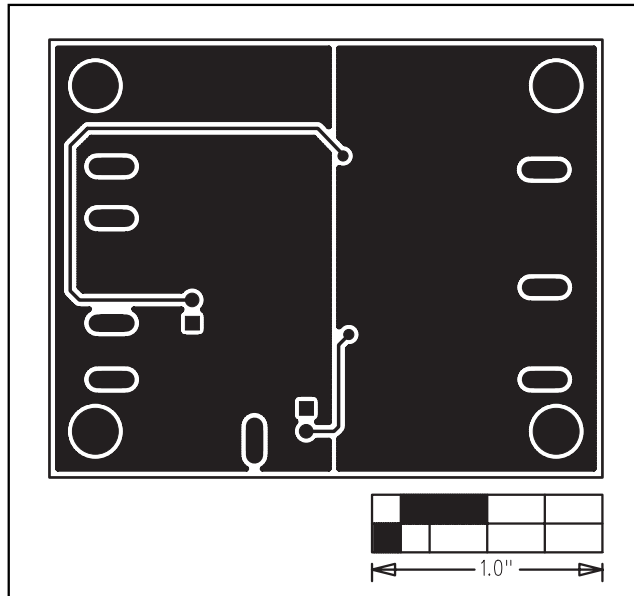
MAX1510 EV Kit PC Board Layout—Solder Side
